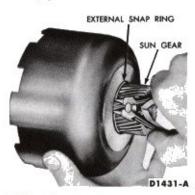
Sun Gear External Snap Ring Removal or Installation
